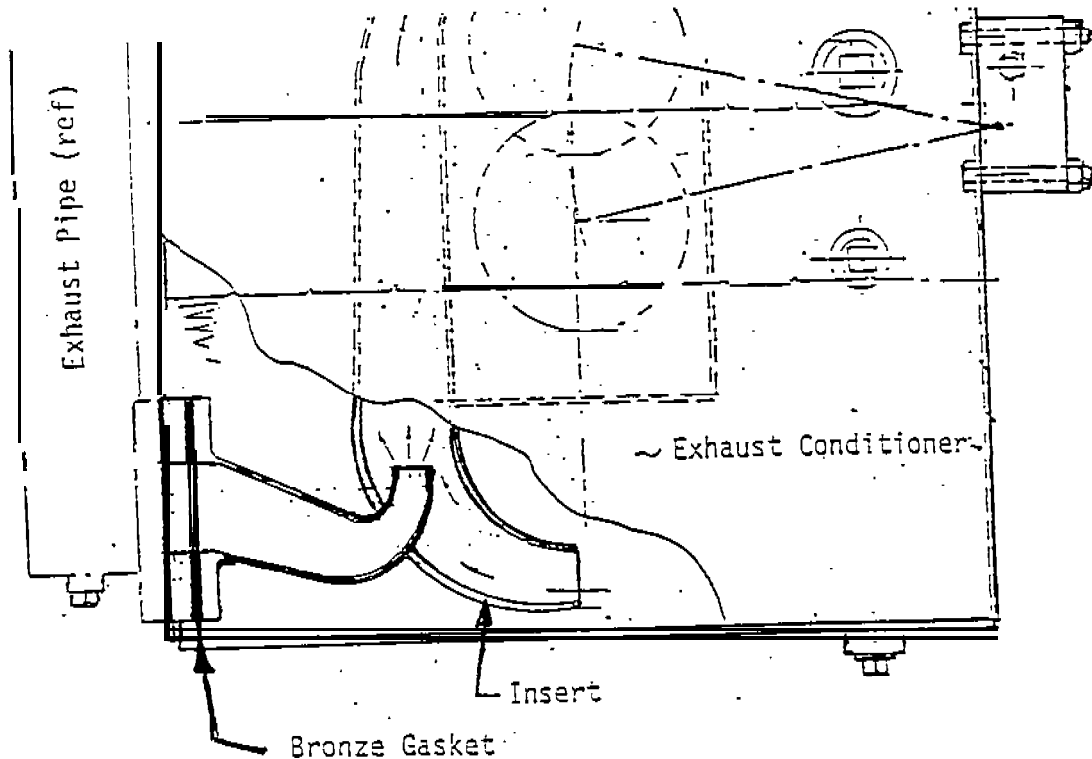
Gasket Between Exhaust Conditioner Flange and Scrubber Insert Flange.
